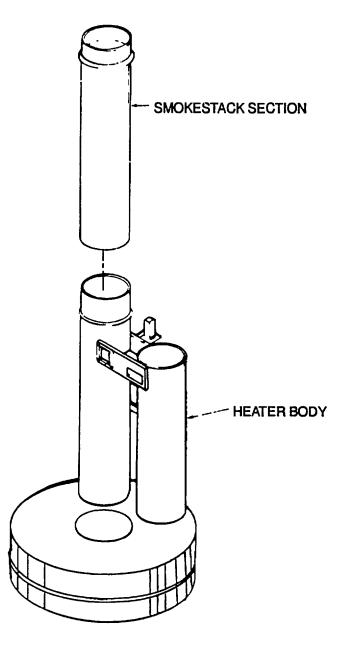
Immersion Heater Smokestack Removal and Installation
